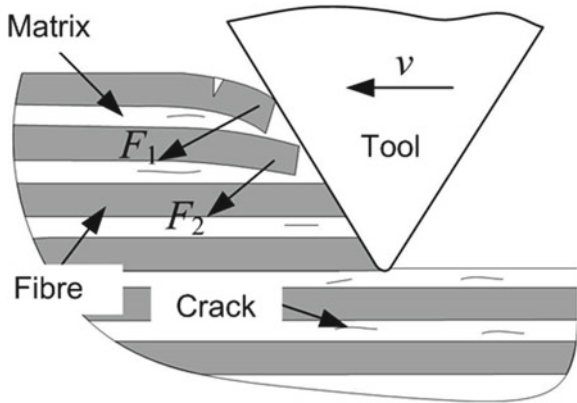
Material removal mechanism of FRP when cutting angle of the cutter is positive
